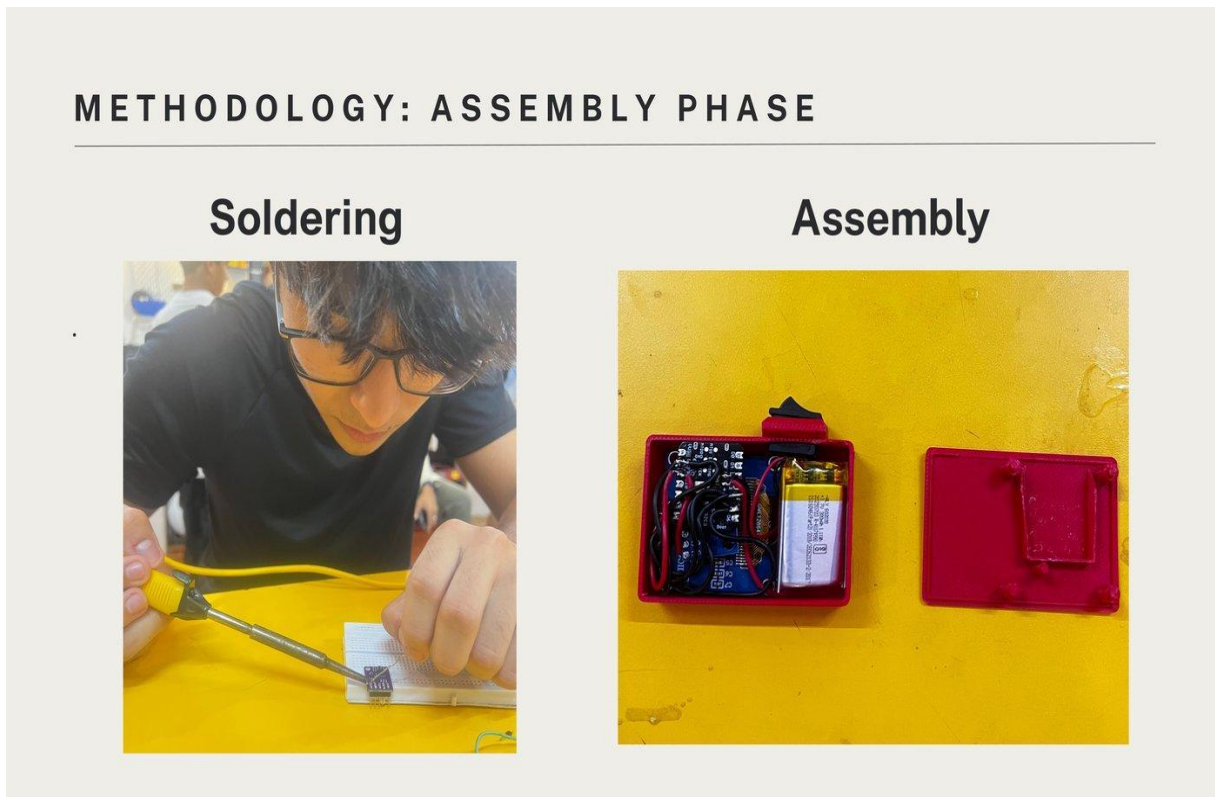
Assembly phase — soldering components onto the perfboard (left) and completed internal assembly within 3D-printed casing (right)
